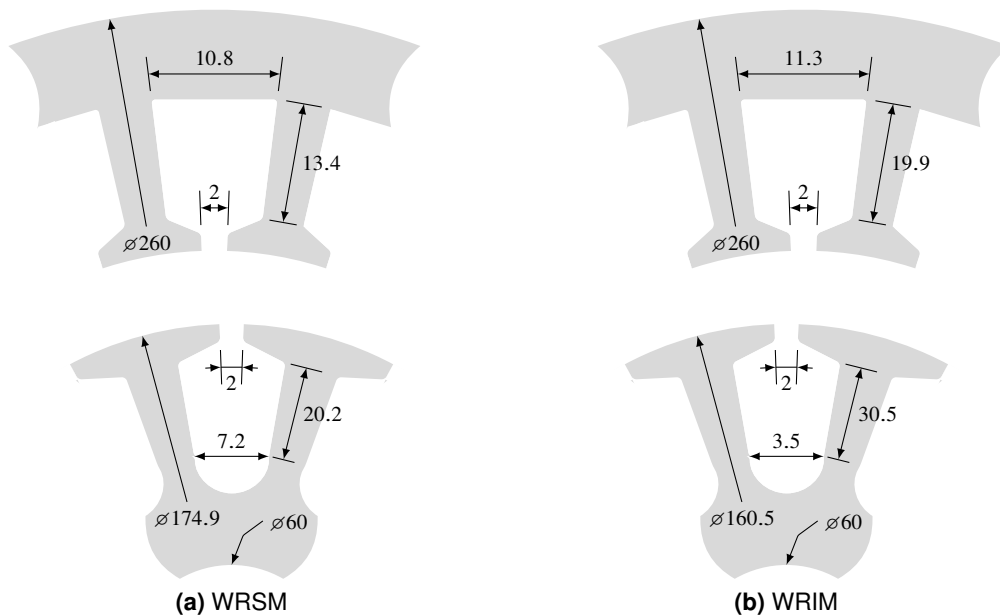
Prototyped motor stator and rotor lamination cuttings dimensions of (a) WRSM and (b) WRIM. Dimensions in mm.
